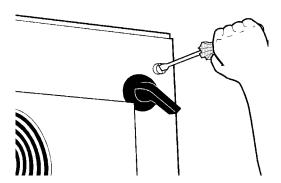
Unscrew the three screws to open the cabinet door. (Newer control cabninets require a key)
